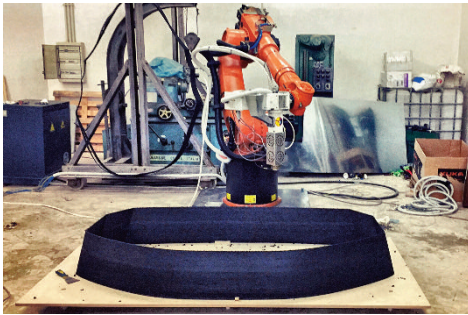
Previous page. The industrial robot Kuka, used in additive manufacturing.
